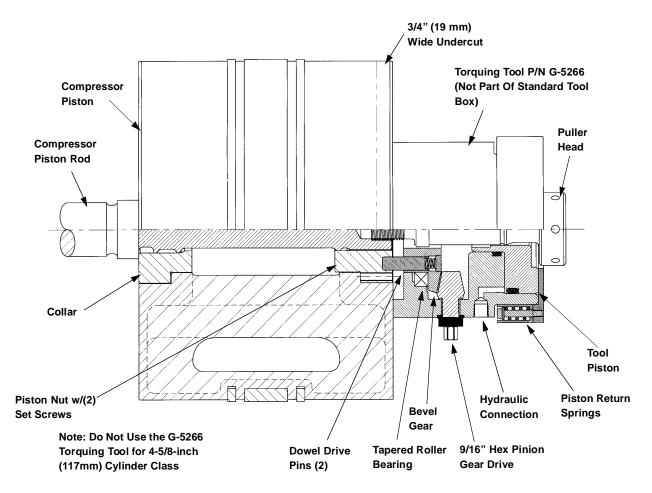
PISTON NUT TORQUING TOOL (P/N G-5266)
